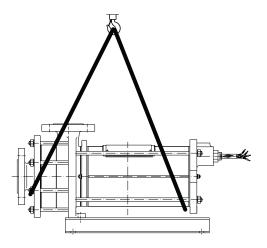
Fastening the lifting gear to the pump unit with base plate
